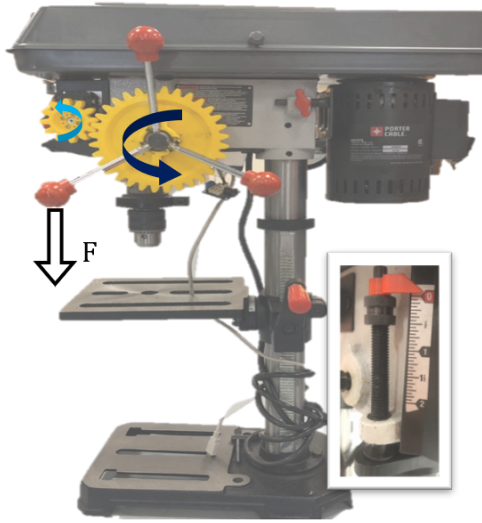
Customized haptic drill press design; drill chuck position (inset)
